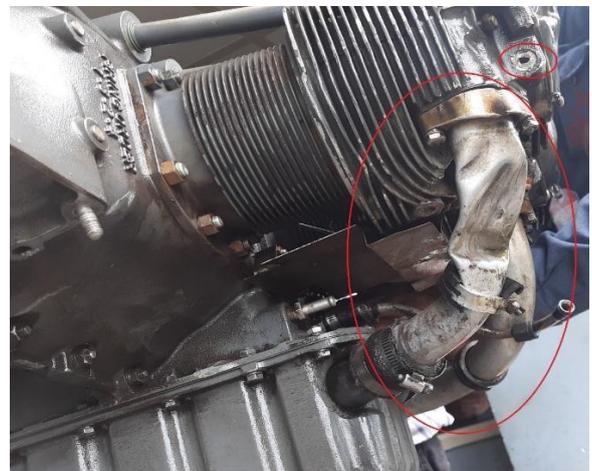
Induction tube (Cylinder 2 & 4) and sheared rocker box oil elbow
